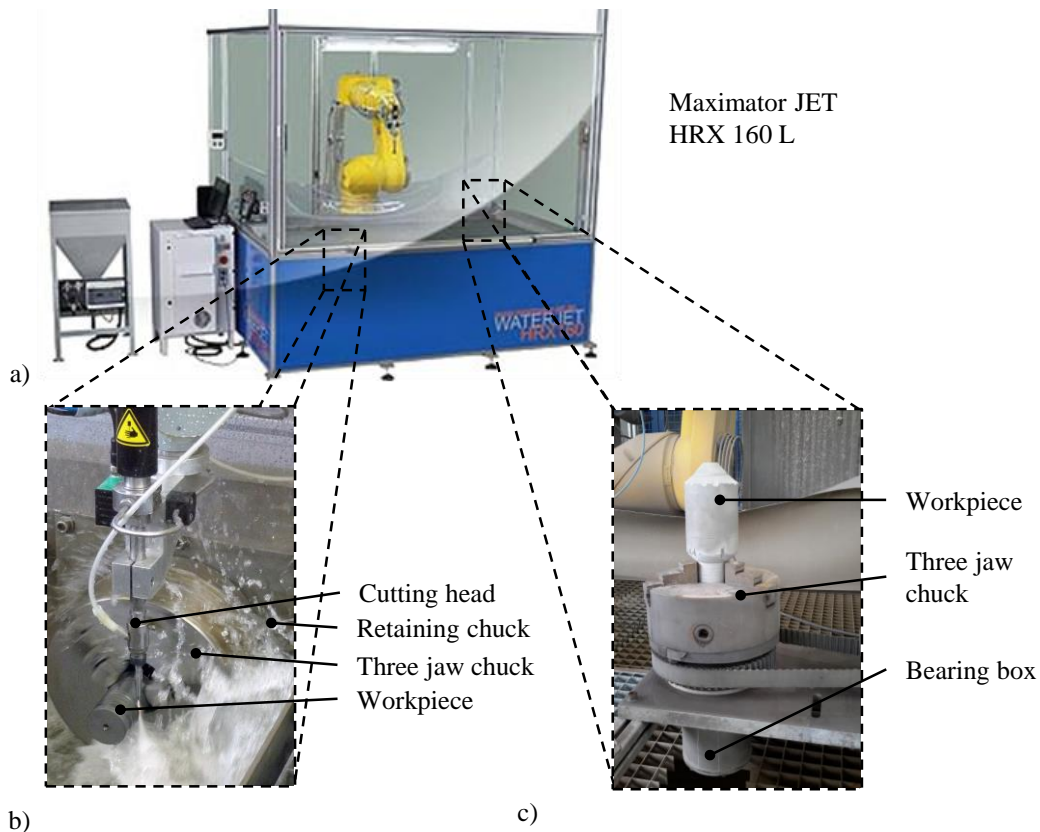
Test setup for the AWJ turning and trepanning operation; a) Maximator JET; b) horizontal spindle 1; c) Flexible spindle 2
